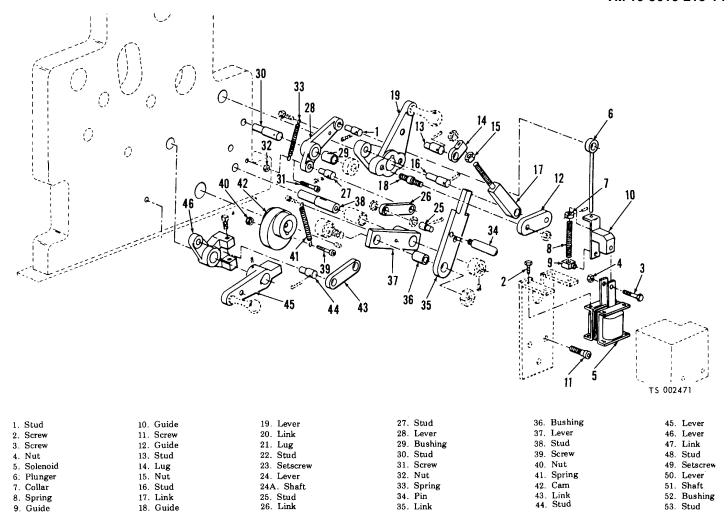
Outer linkage assembly (Sheet 1 of 2).
